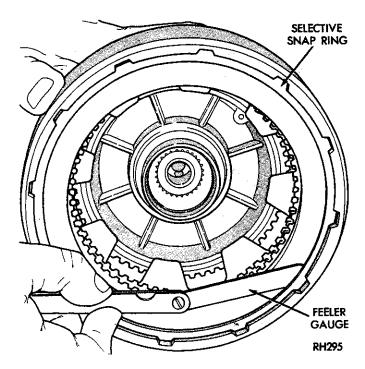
Measuring Rear Clutch Pack Clearance—All REAR CLUTCH—A-727
